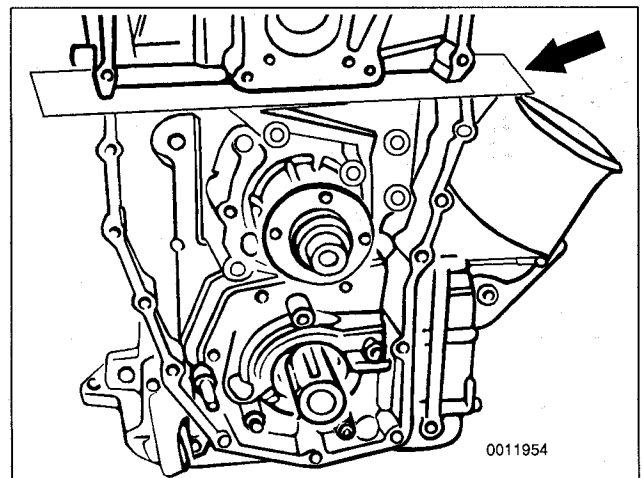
Use thin sheet metal (arrow) to protect profile gasket during installation of timing chain case. Carefully withdraw sheet metal after tightening fasteners.
